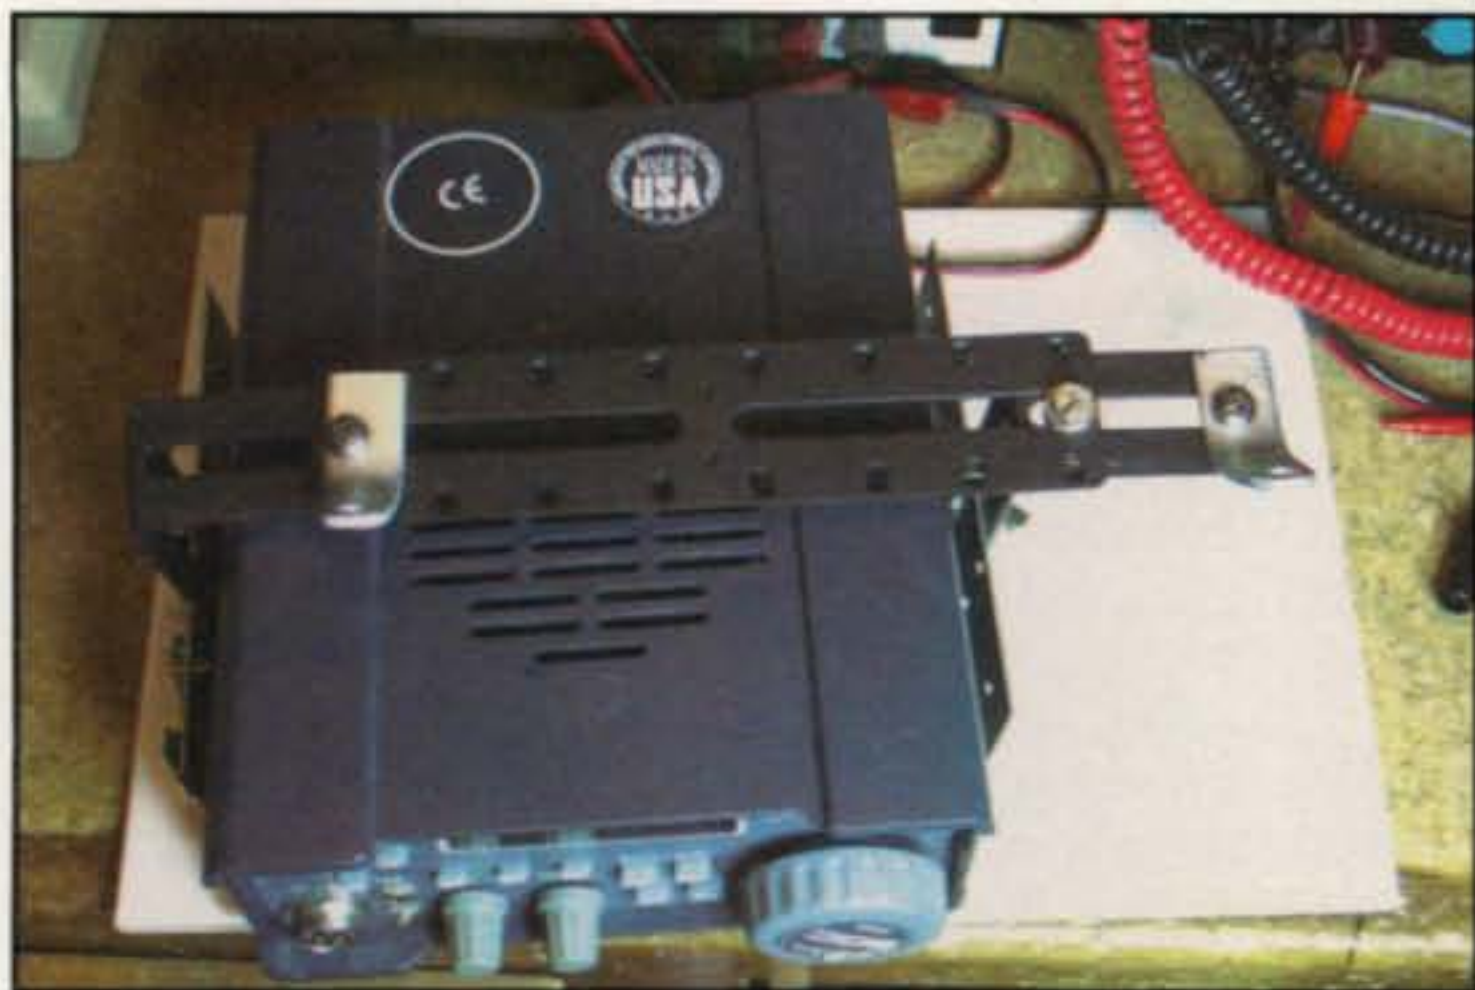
Once the mounting assembly is complete, it can be attached with wing nuts to a standard RadioShack bracket for mounting in your vehicle.
